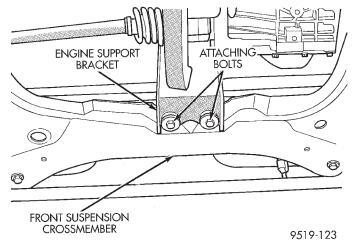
Engine Support Bracket To Crossmember Attaching Bolts
